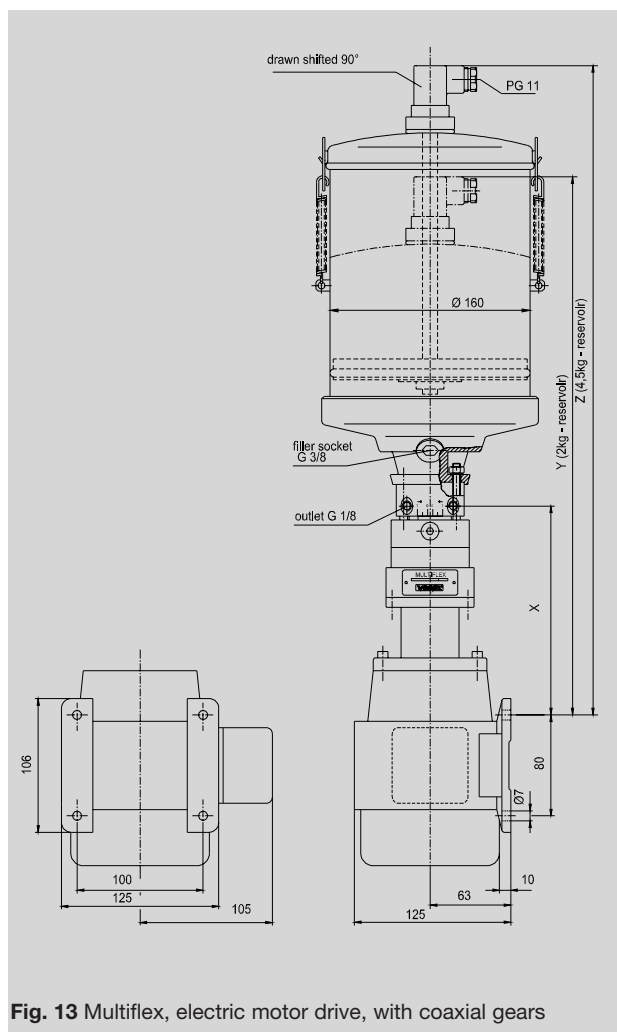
Multiflex, electric motor drive, with coaxial gears
